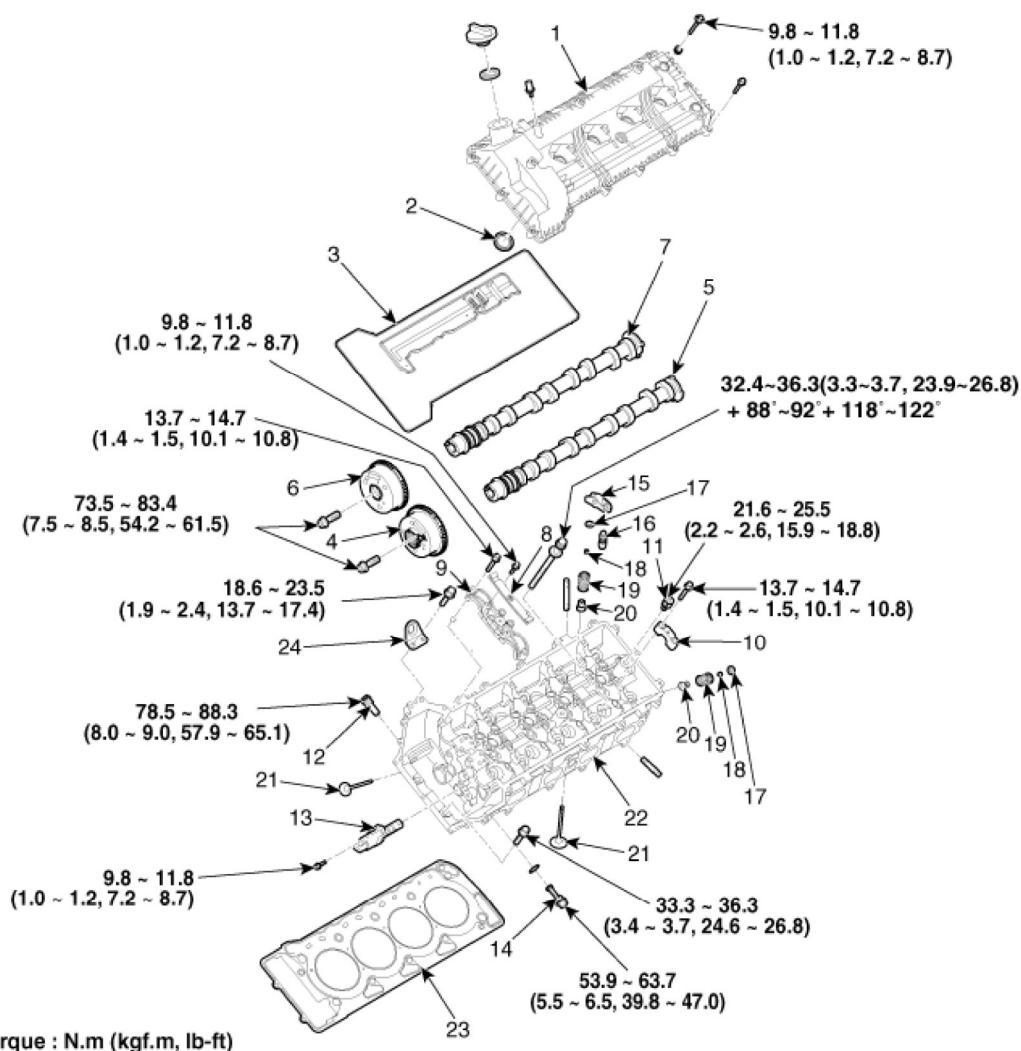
Exploded View Of LH Cylinder Head Assembly With Torque Specifications
